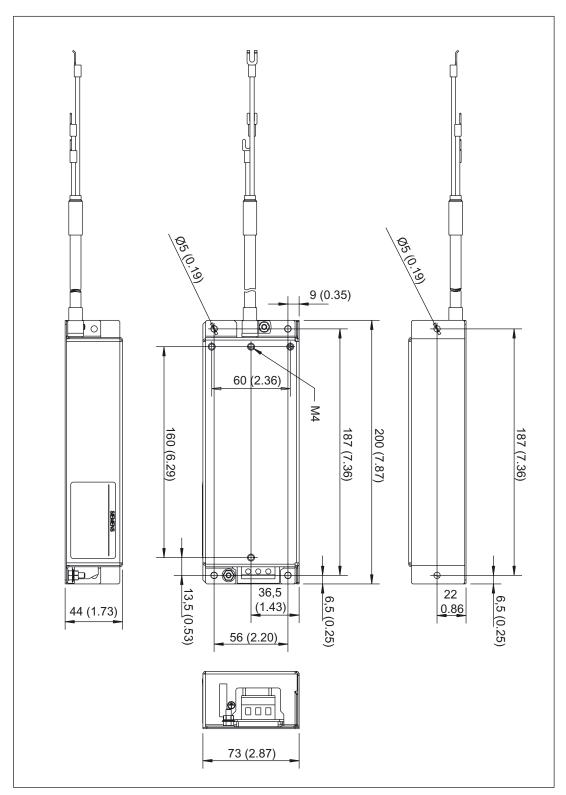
Dimension drawing: Line filter, frame size FSA
